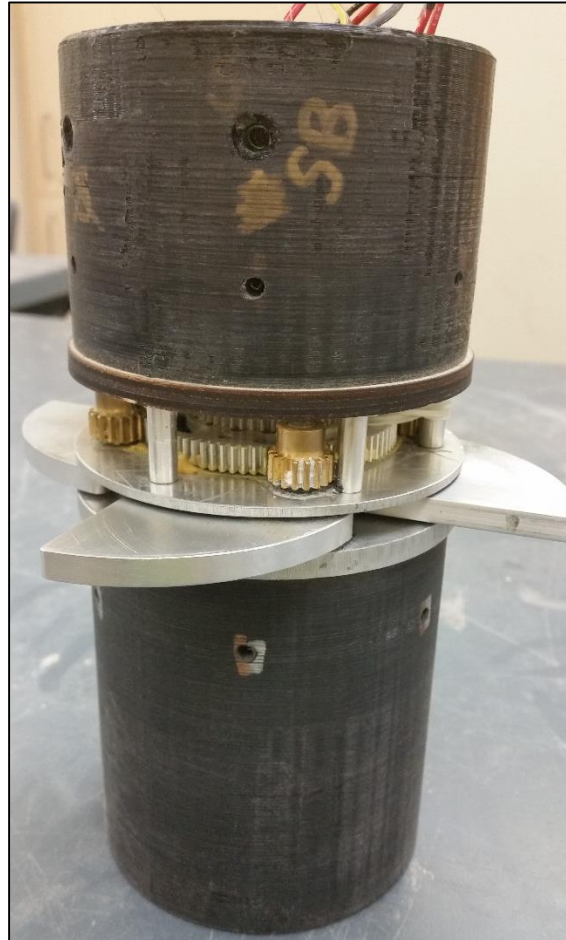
A photo of the Air Brake assembly with the 3D-printed shoulders.
